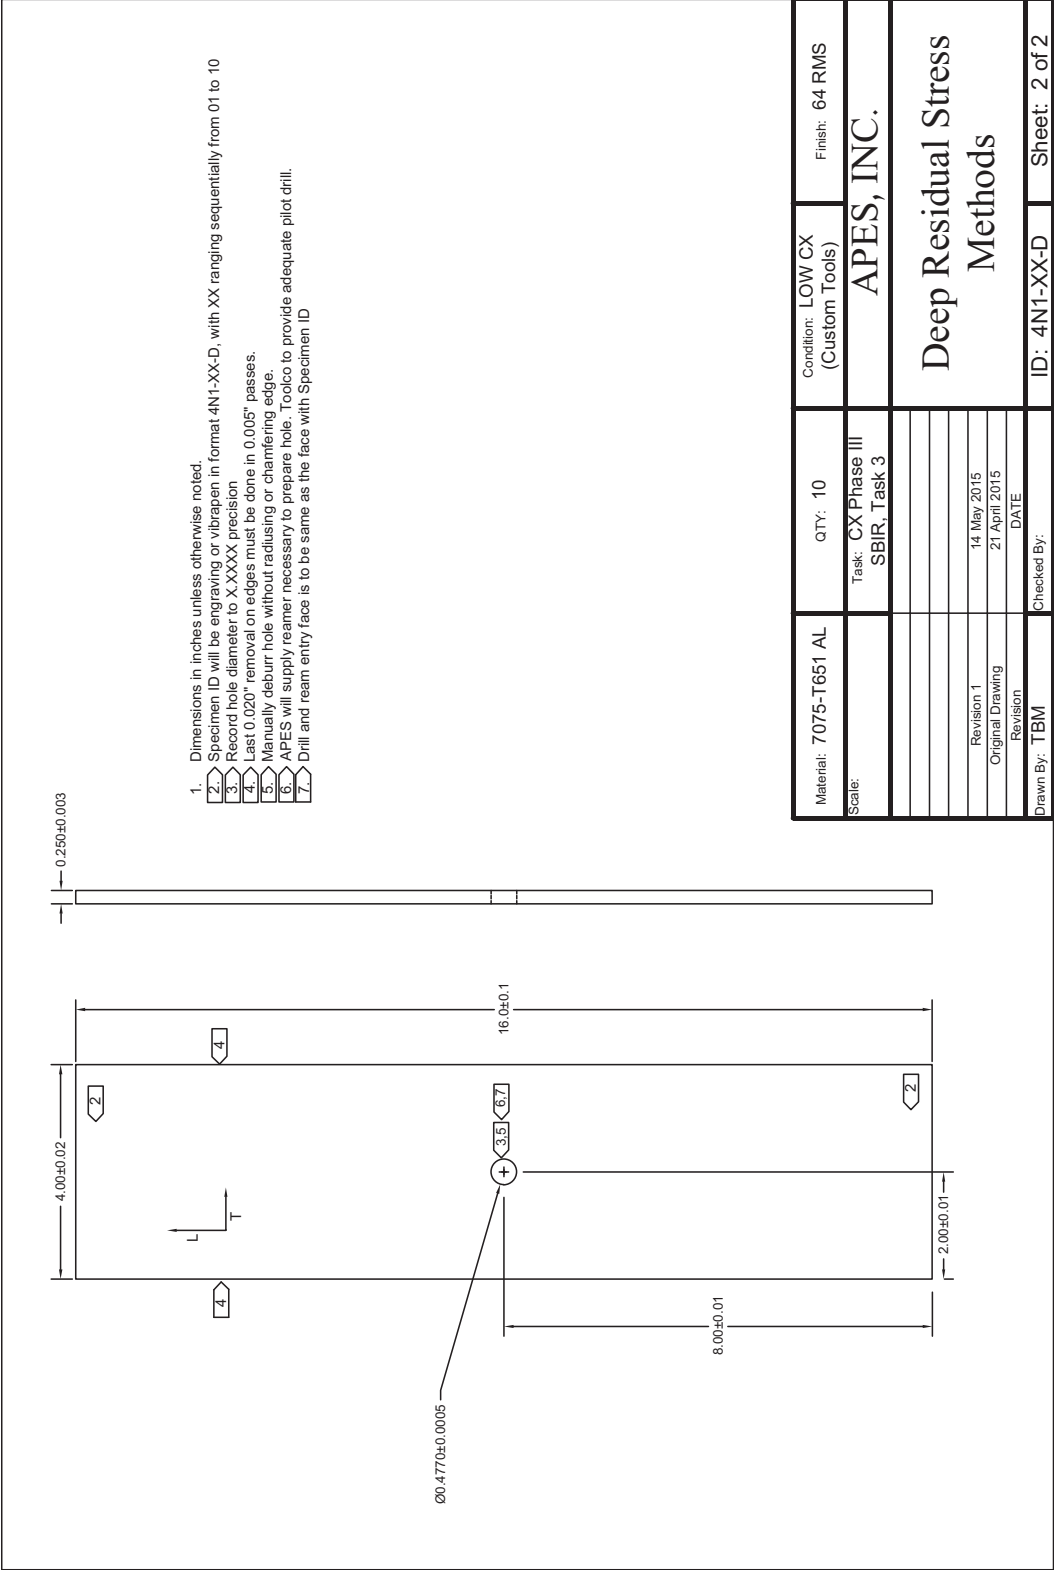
Fatigue Coupon Drawing Showing Final Hole Size of 0.4770 for Cx4N1-XX-D (7075-T651) "Low" Applied Cx Expansion Level.
